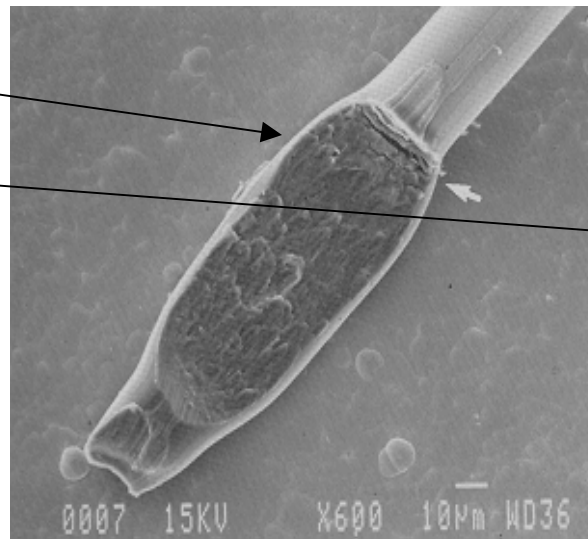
Scanning electron microscope photograph of fatigue fracture of a bond wire, 1275x
